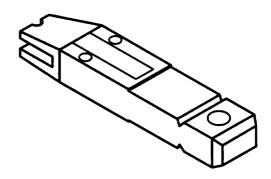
950C-Type Wire Insertion/Removal/Cutter Tool
